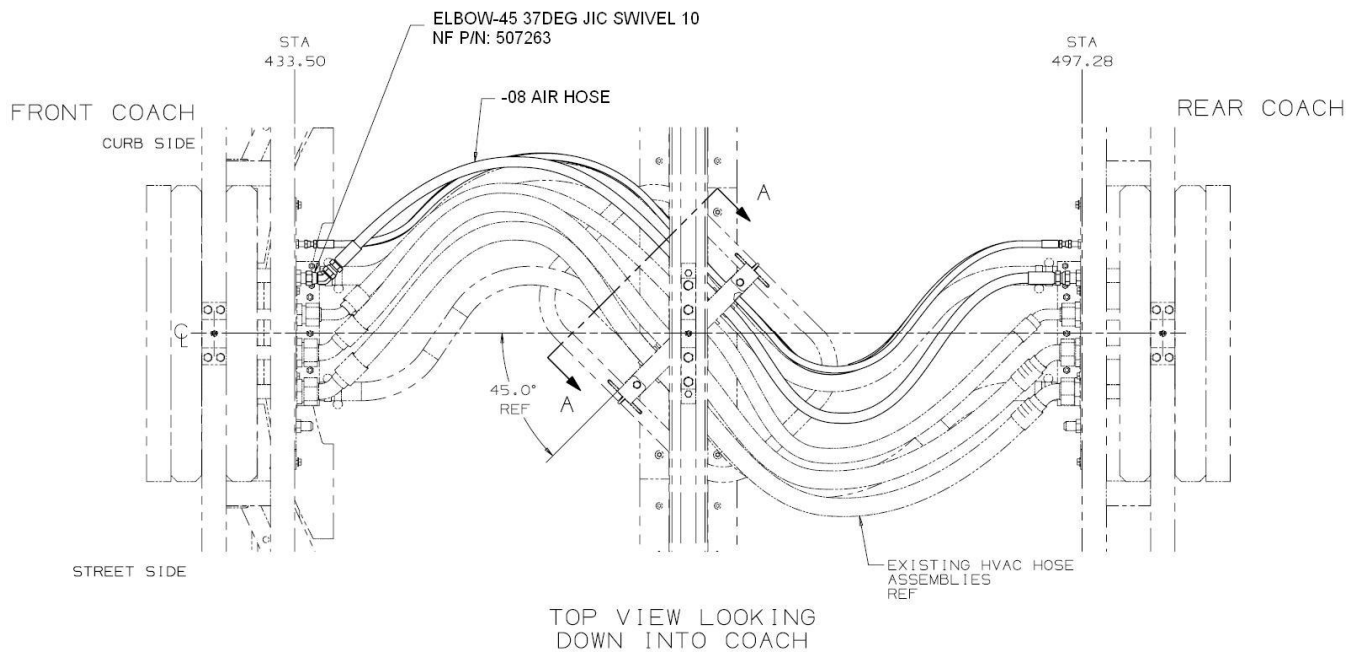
AIR LINE ADDITIONAL 45° ELBOW FRONT BULKHEAD
